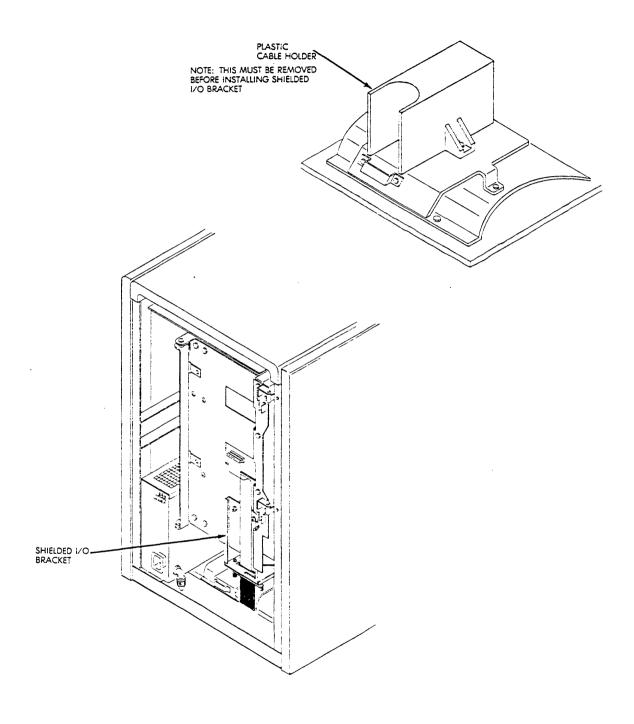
SI 9775 Shielded Cable I/O Bracket Location
